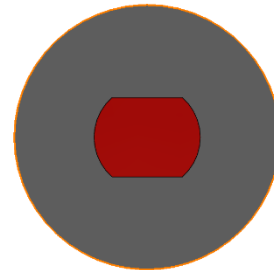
Cross-sectional view of the piston rod in the prosthesis.
